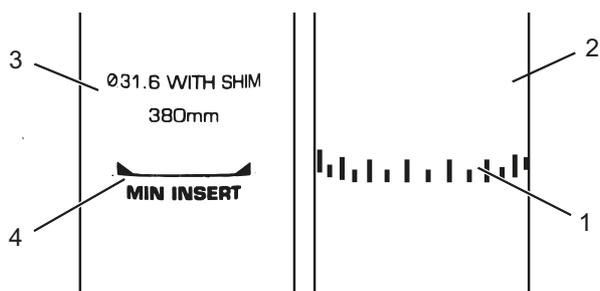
Detailed view of the seat post – examples of the minimum insertion depth marking
